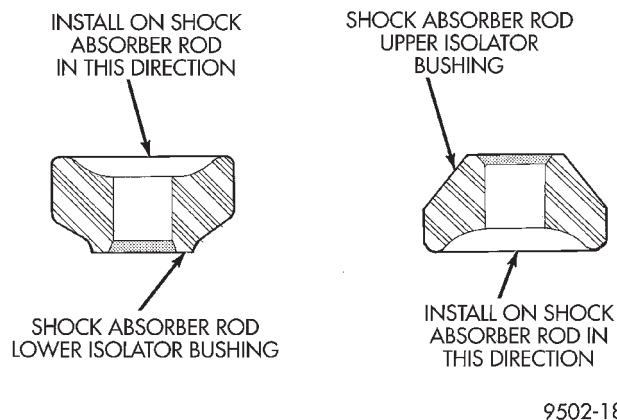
Upper And Lower Shock Absorber Rod Bushing Identification
